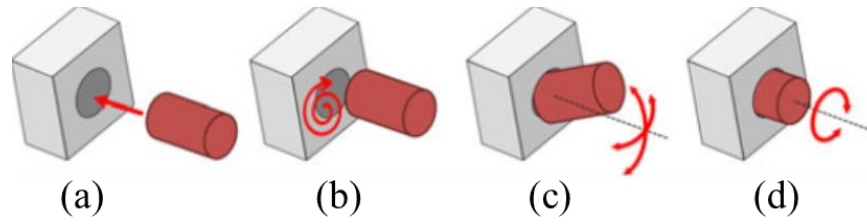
Unit motions for peg-in-hole assembly. (a) Pushing. (b) Rubbing. (c) Wiggling. (d) Screwing. [3]
